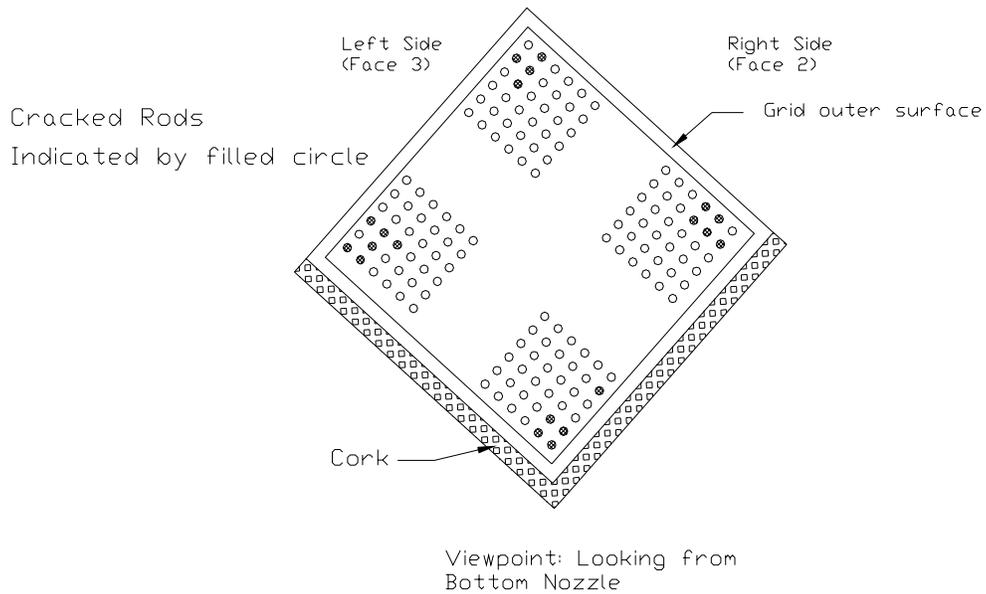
Cracked Rod Locations on CTU Fuel Assembly
